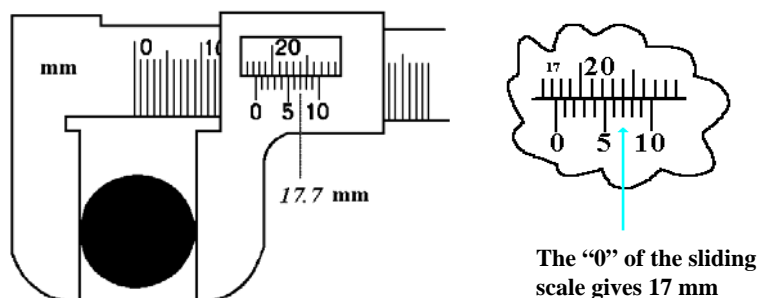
Measuring the diameter of a metal rod using vernier calipers.
